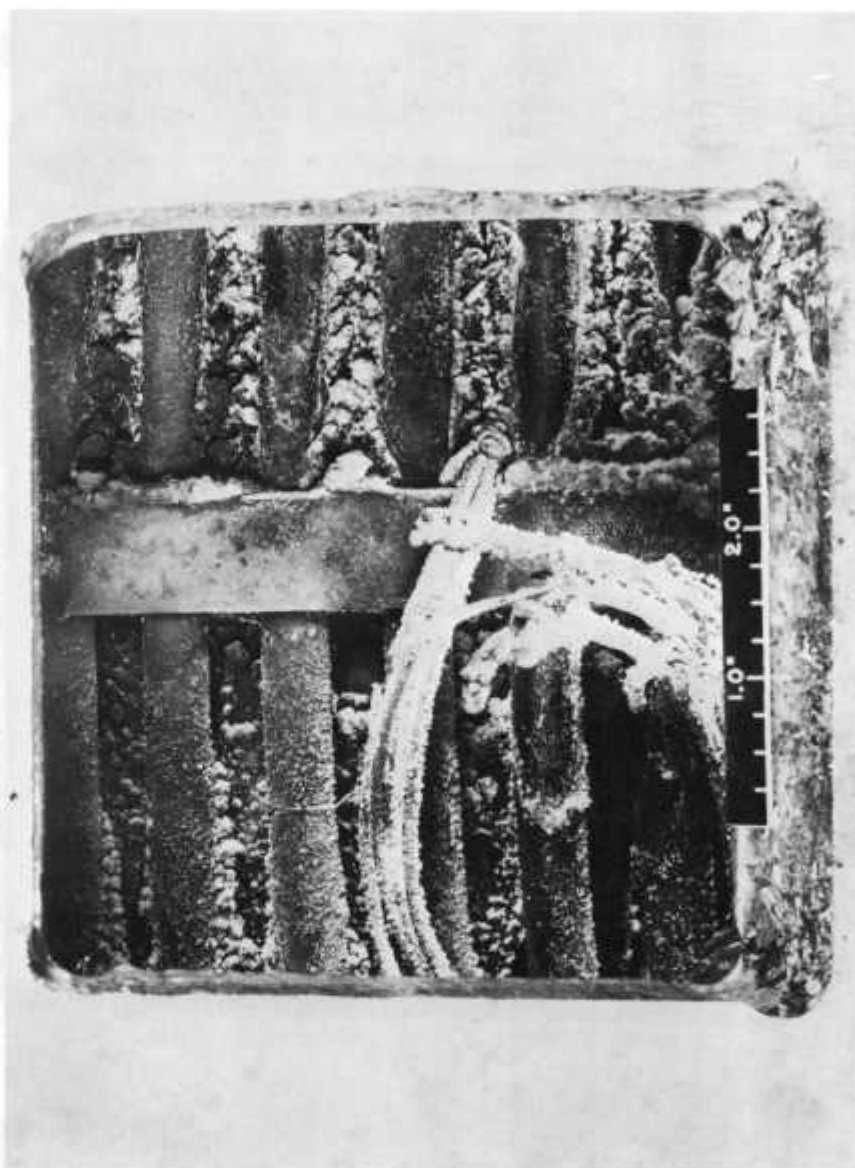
Appearance of Heat Exchanger Tubes and Interslices as Viewed Through Cut-Out in Shell Near Upper Tube Sheet. Note damaged condition of thermocouples which originally connected to feedthrough in cut-out area.
